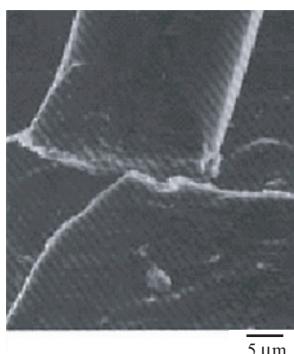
Damage on Wire Due to Ultrasonic Fatigue
